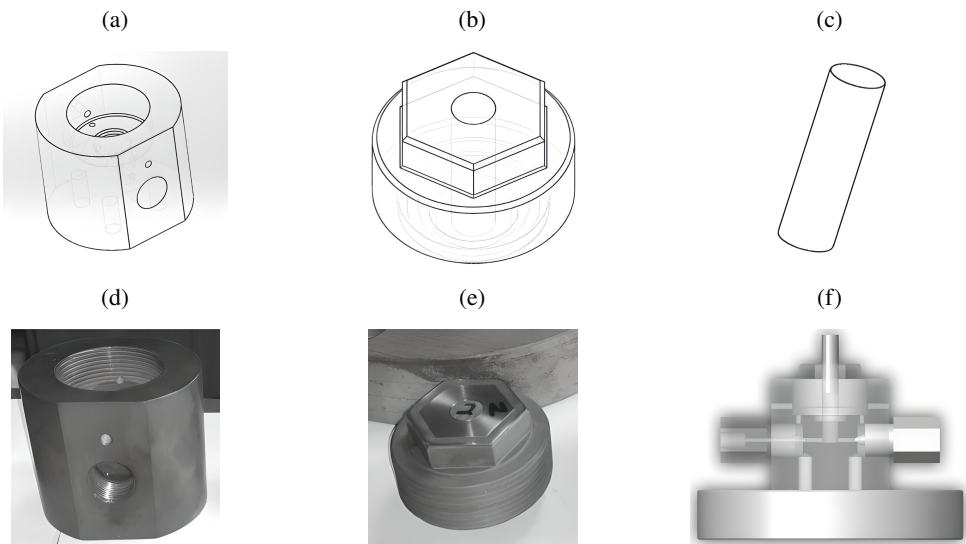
3D model of the measuring head (a), 3D model of the cylinder (b), 3D model of the piston (c), finished measuring head (d), finished piston-cylinder unit (e) and transparent assembly image (f).
